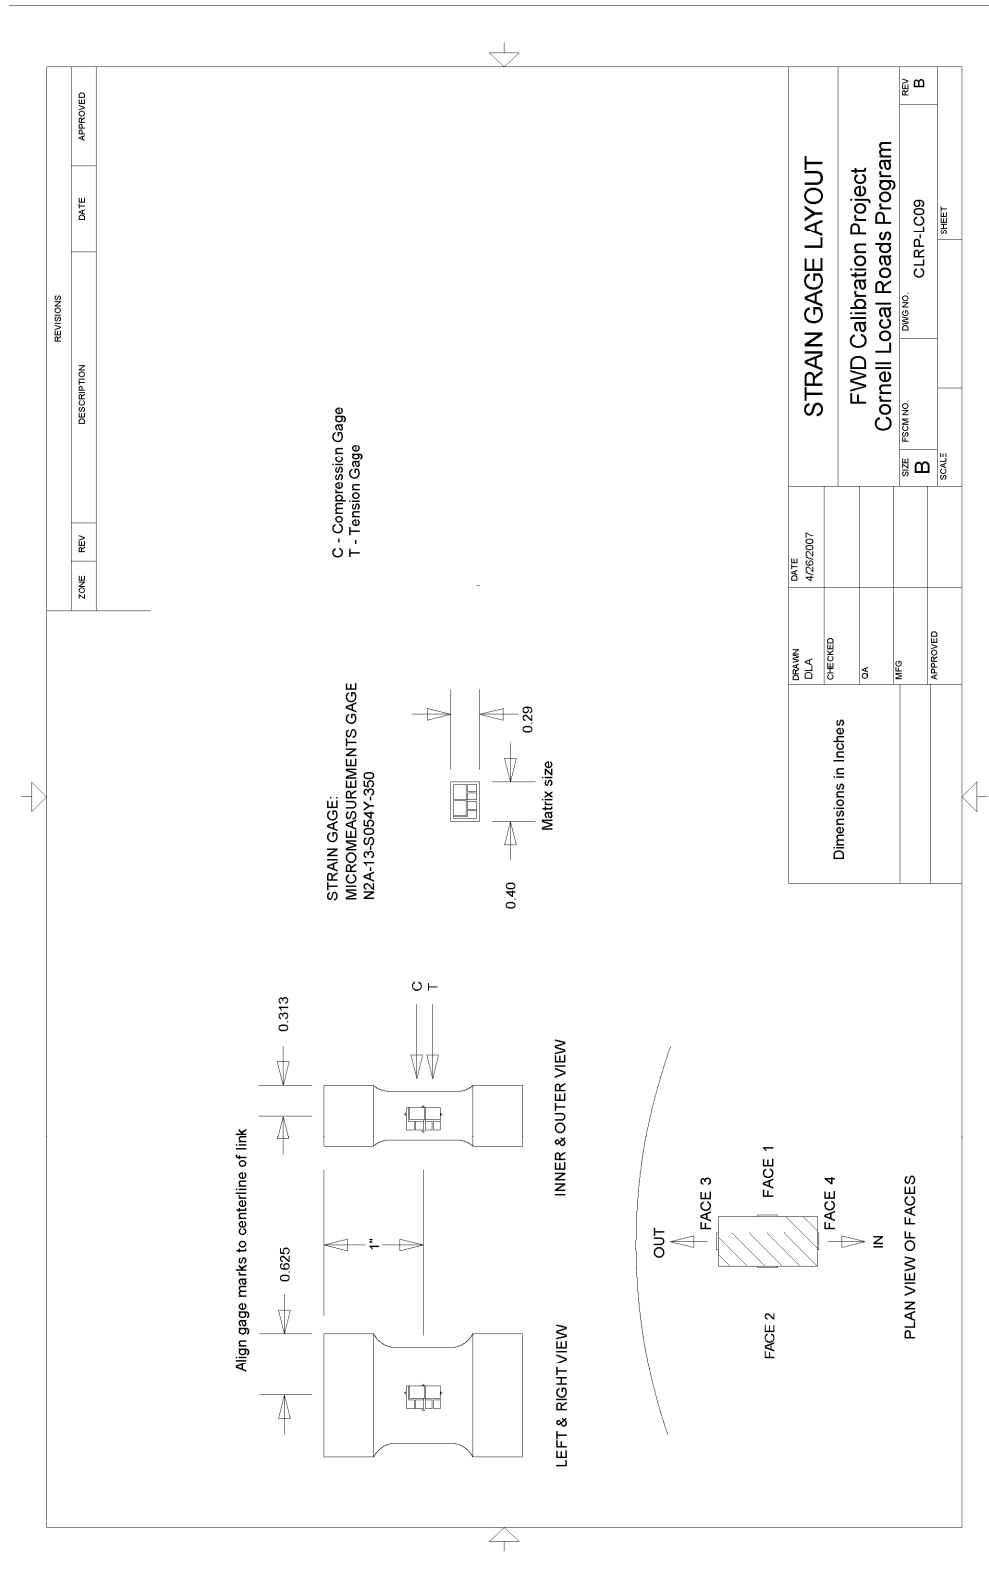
Drawing. CLRP-LC09 Strain Gage Layout.
